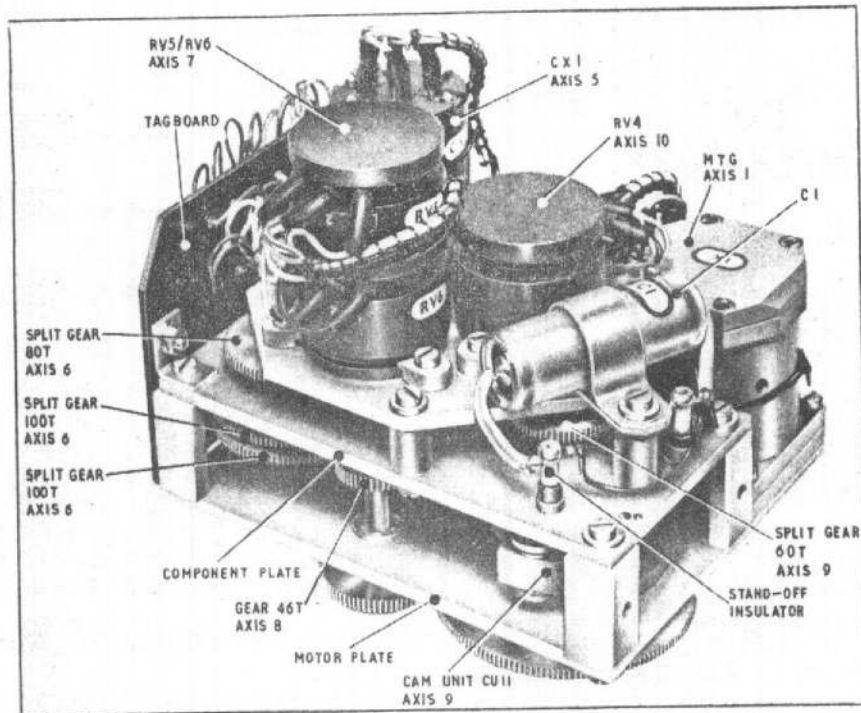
T.A.S. output gearbox assembly (G7)—view A
